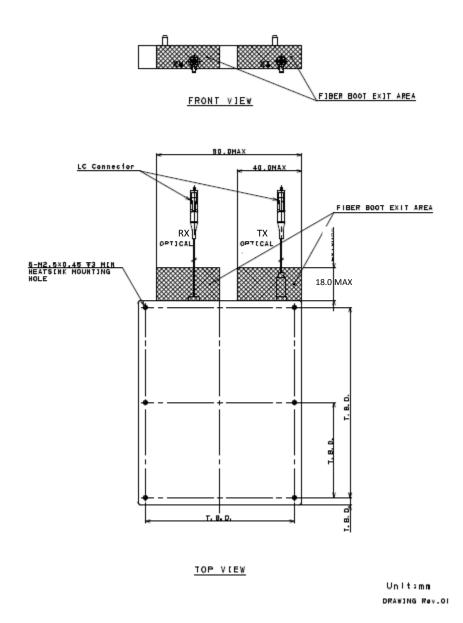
MSA-100GLH Flattop mechanical dimensions - top view
